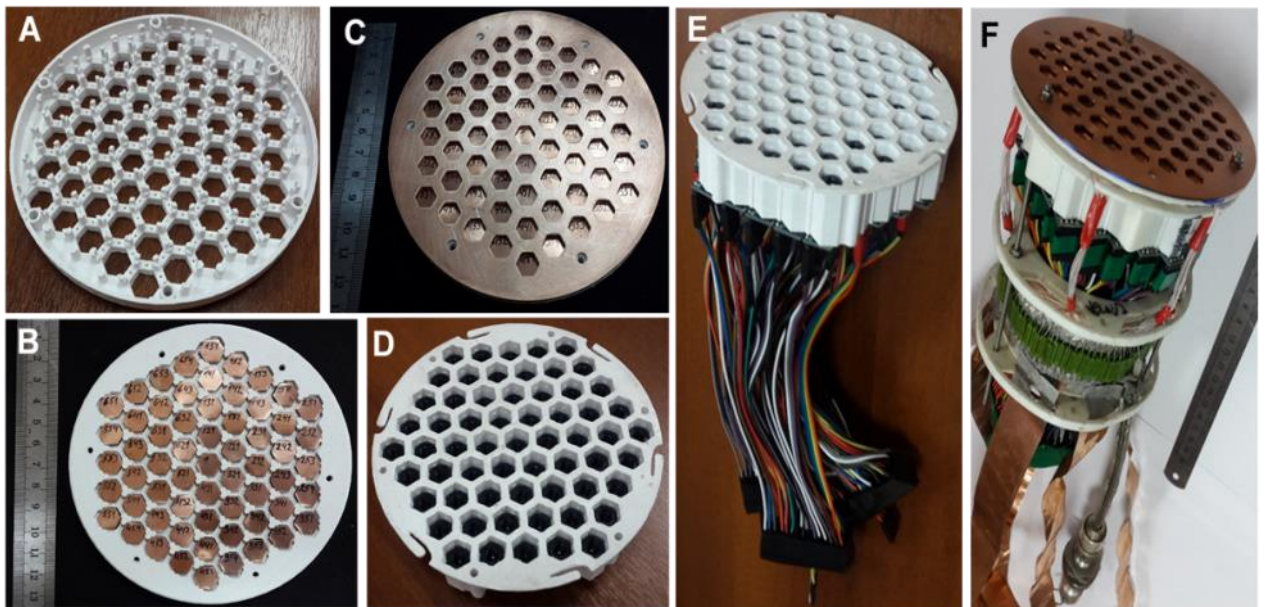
Stages of the device assembly: A - 3D-printing of the main units; B - mounting and soldering sections; C - production and installation of a protective screen; D - mounting the sensor unit matrix; E - creation and installation of jumper cables and power supply buses of sensors; F - production of a FC shunt, final assembly of the main components into a single unit of the device
